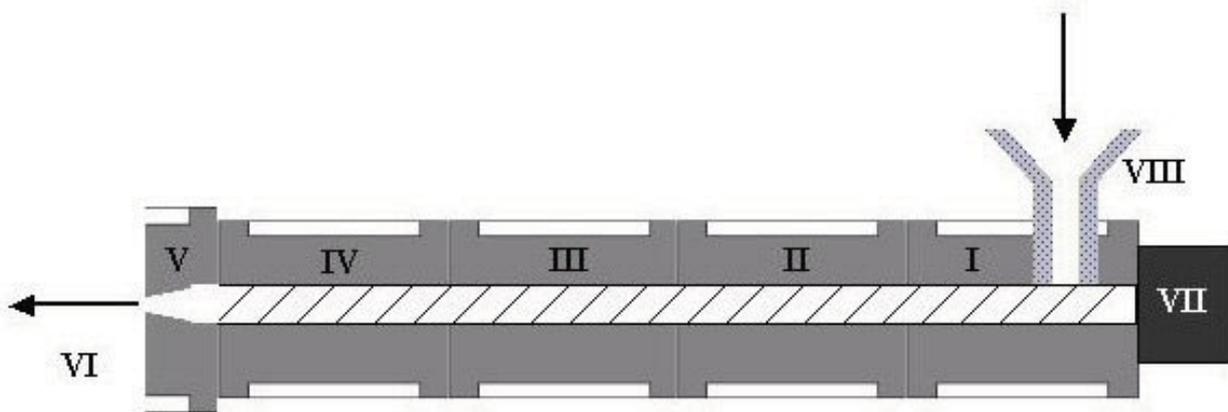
Design of twin-screw-extruder; I-V): heating sections (I-IV barrel, V die); VI) 1x22 mm sheet ribbon die; VII) actuator; VIII) cooled inlet
